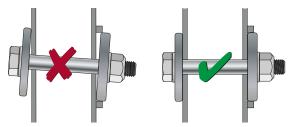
Ensure QUIK-ALIGN Pivot Bolt Correctly Positioned
